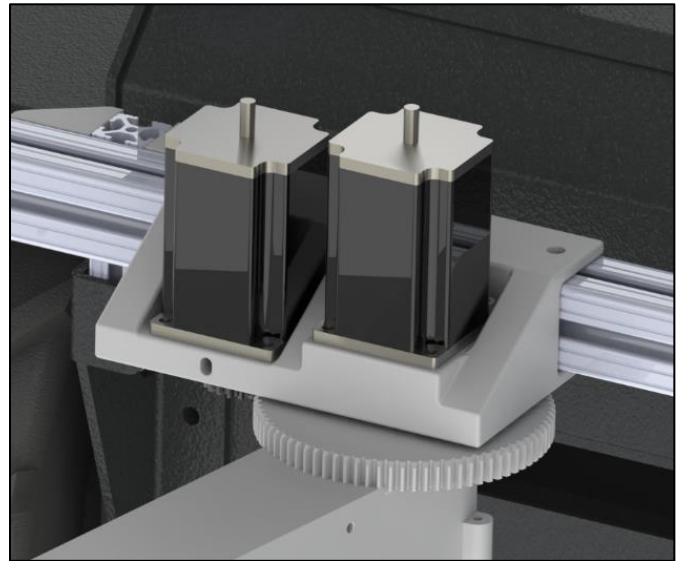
SolidWorks model of the 80/20 bracket and stepper motors
